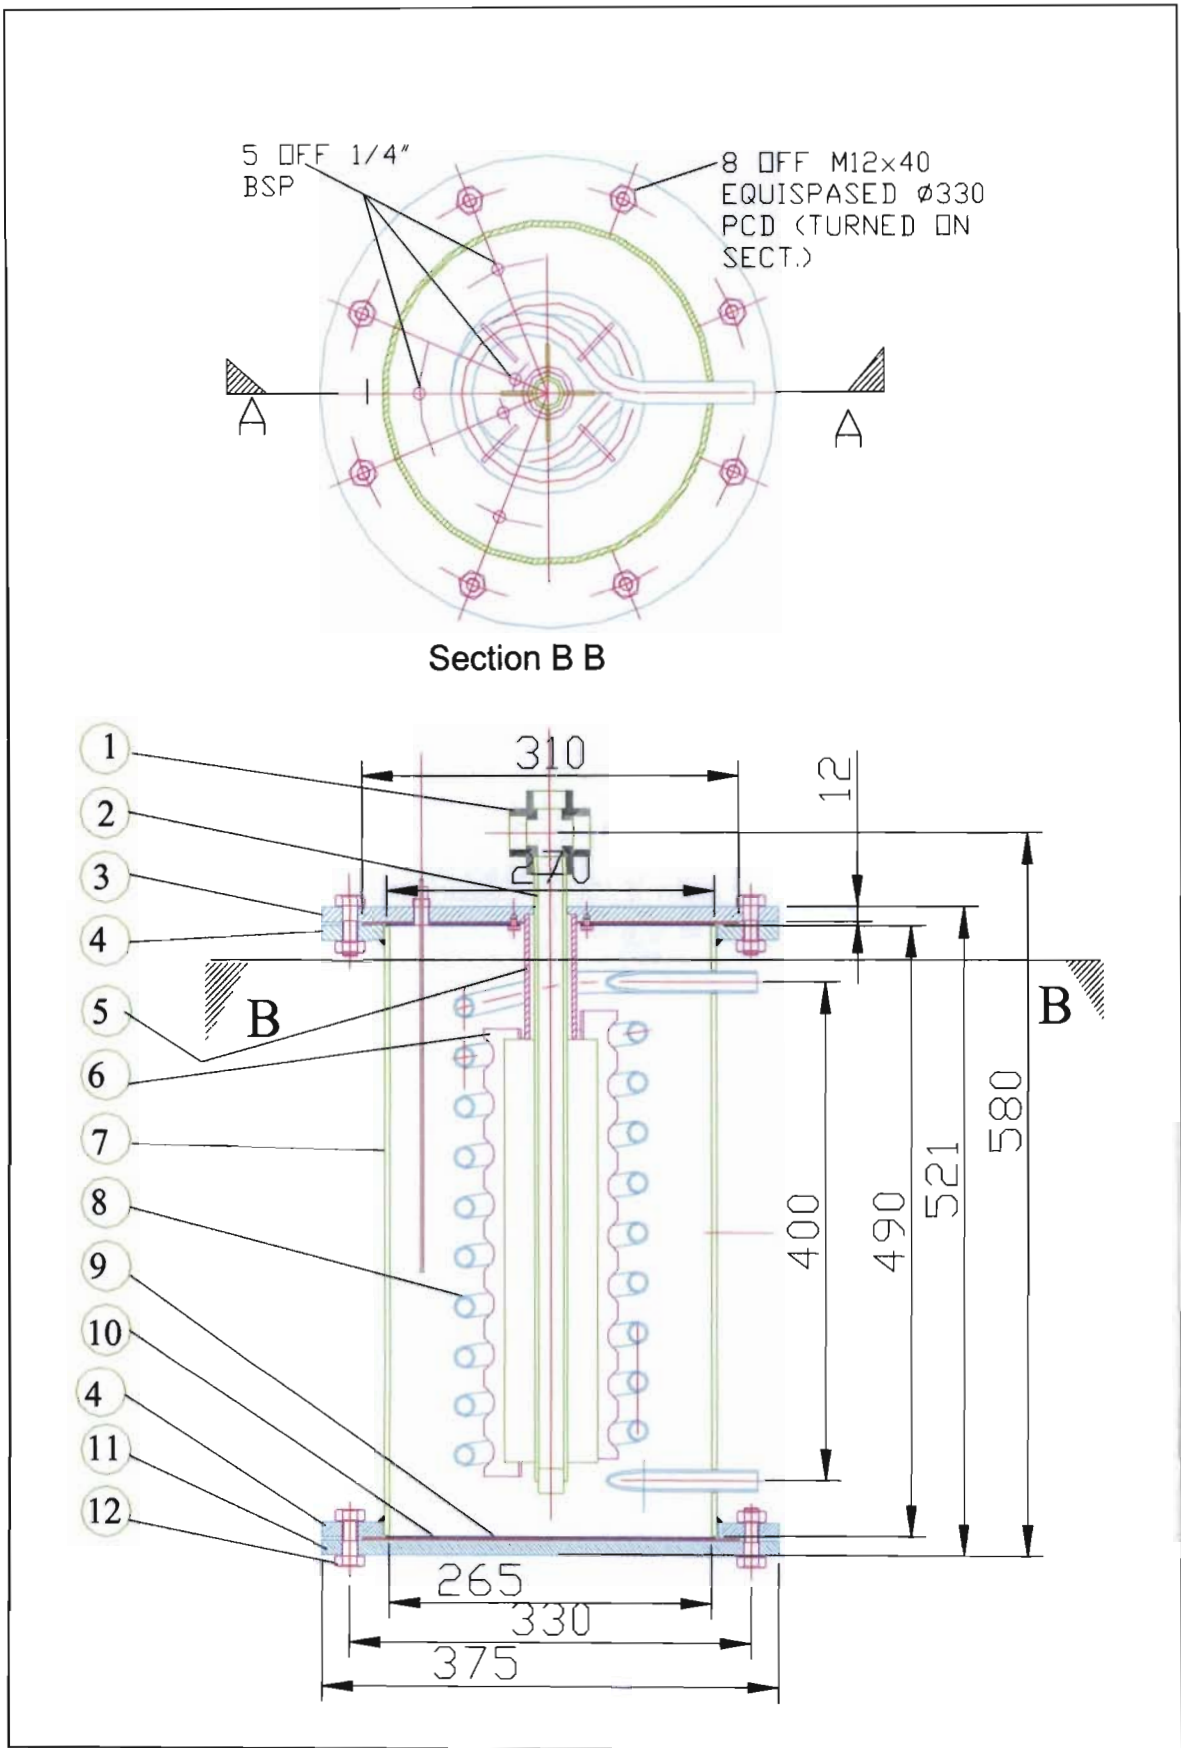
Drawing Design of Second Heat Storage Calorimeter
